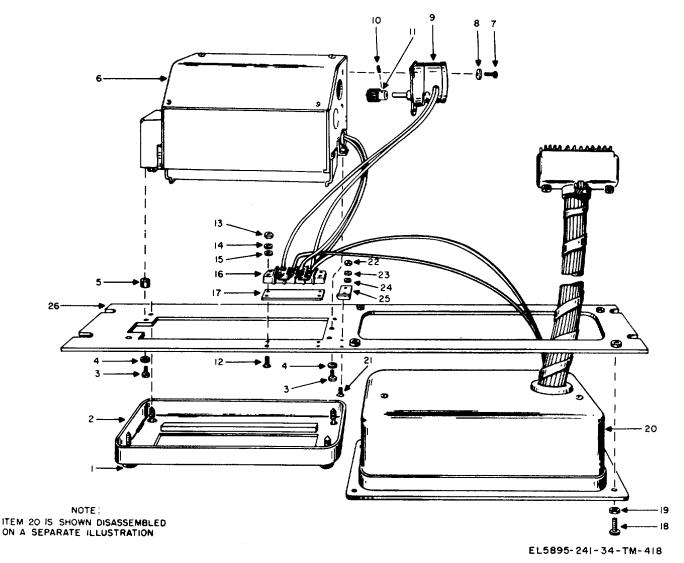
Clock and digital readout panel (part of OA-2054/FSW-8. removal of assemblies.
